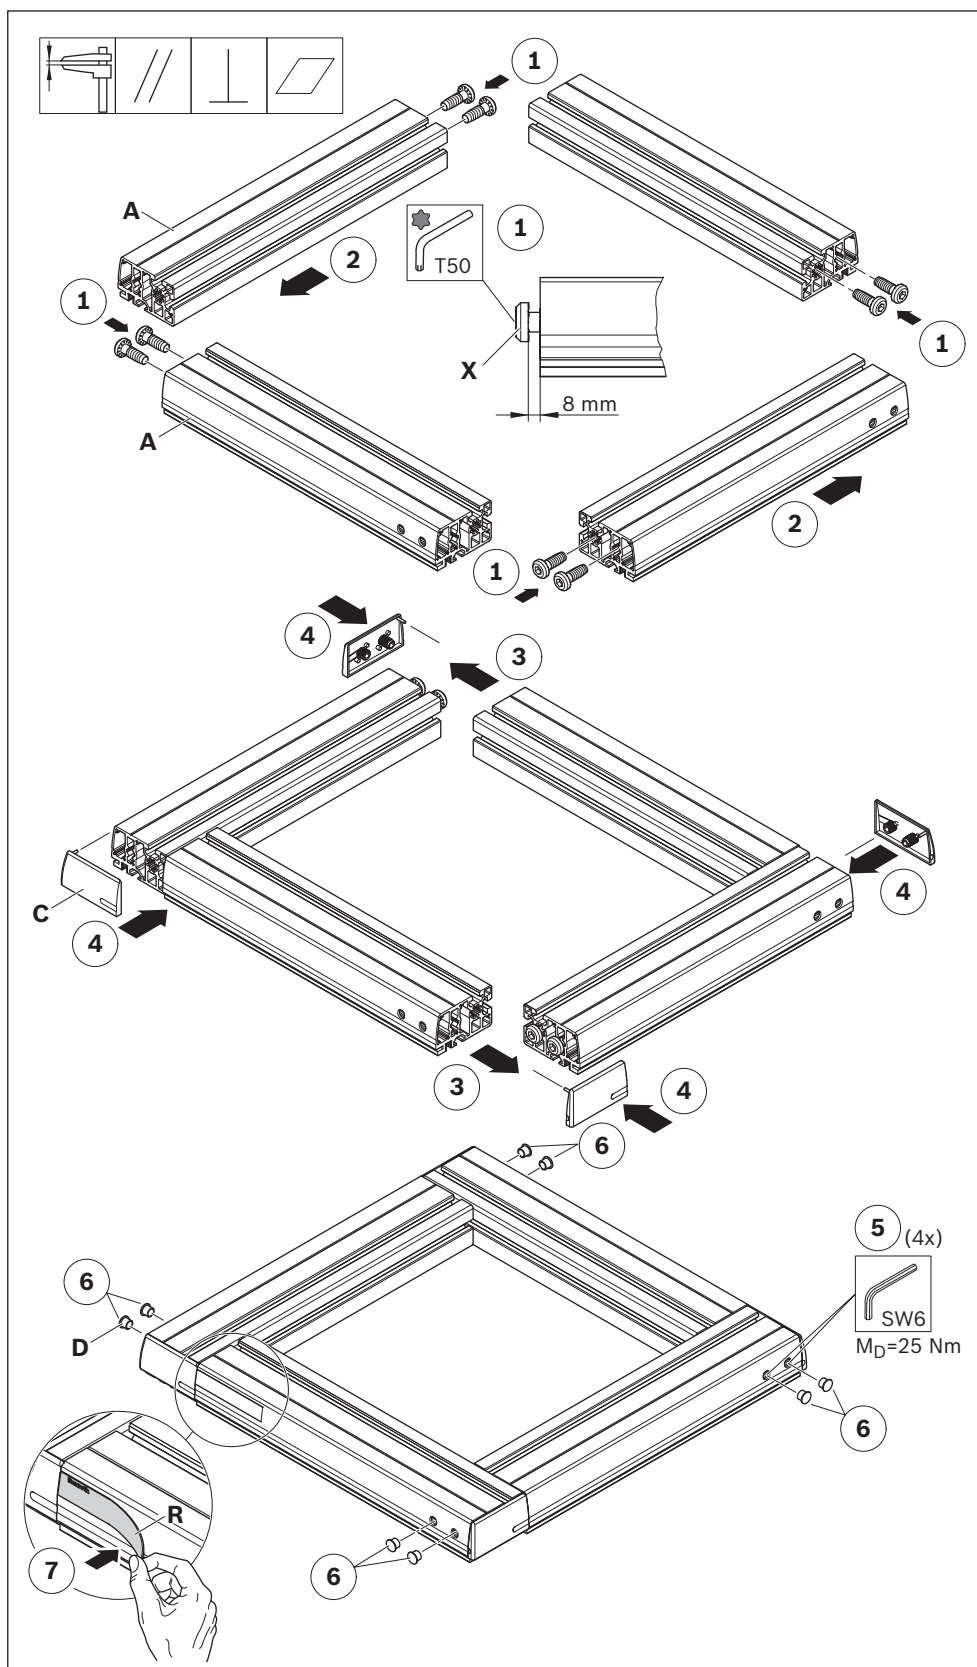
Assemble workpiece pallet WT 2/F-H (1/2)
